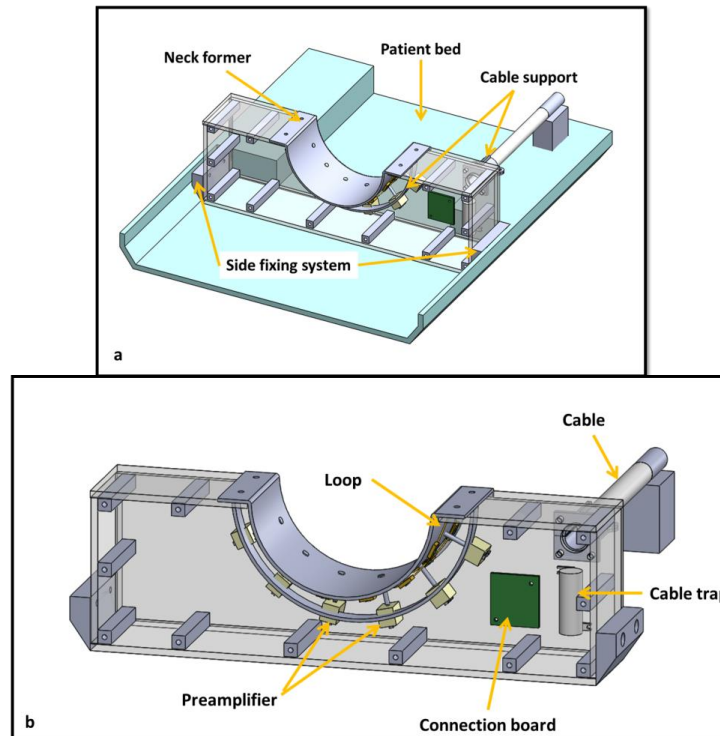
Illustration of coil assembly. (a) 3D model of the coil holder and electronics mounted on the patient table. (b) Detailed view of neck coil including housing and electronics.
